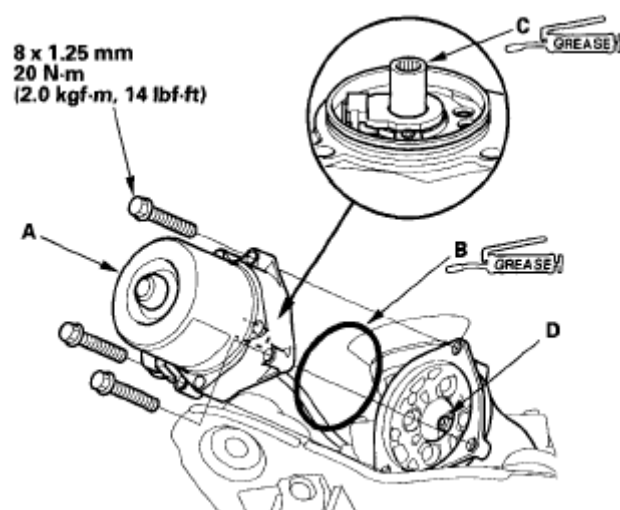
Identifying Mating Surface Of Motor (A) And Steering Gearbox
